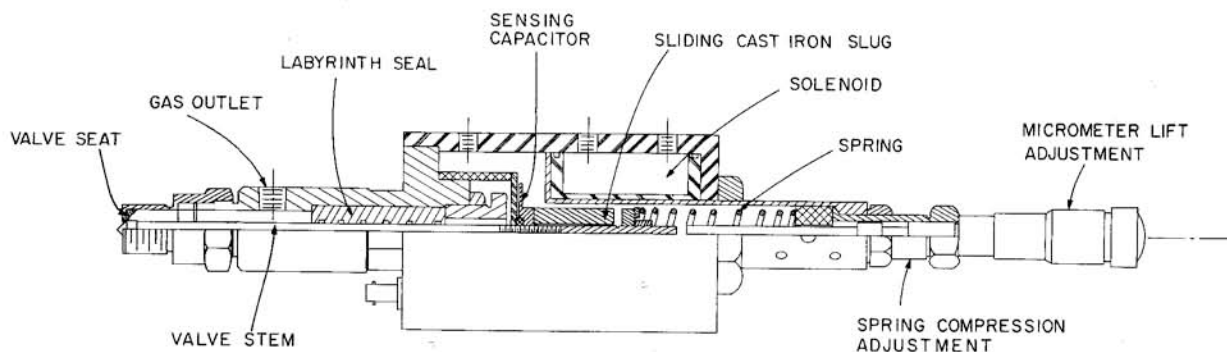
Assembly drawing of sampling valve, from Reference 11
